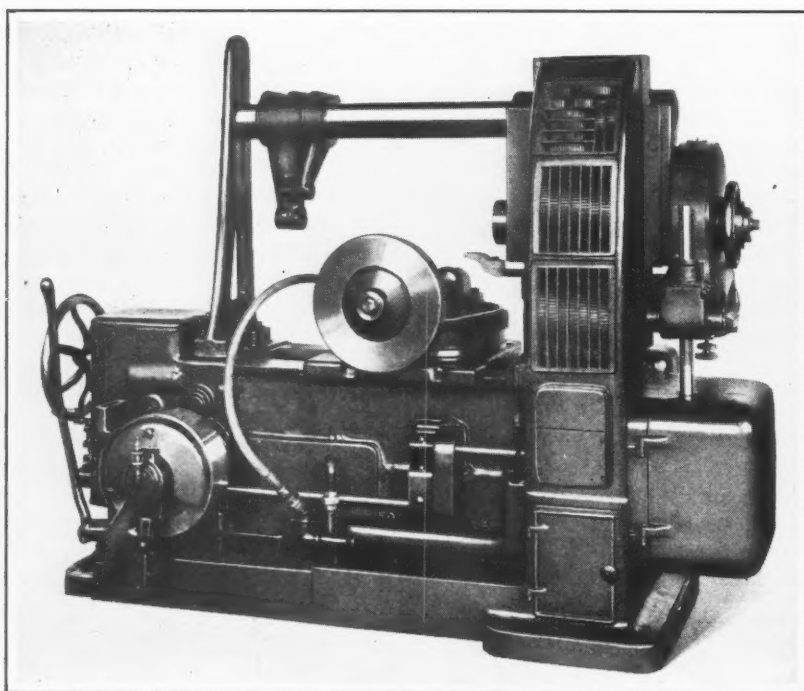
Rear View of Brown & Sharpe Spur and Spiral Gear Hobbing Machine
